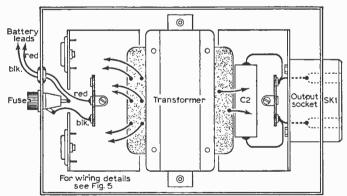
A general view of the unit, indicating the remaining wiring to be carried out extra to that shown in Figs. 5a and b.
